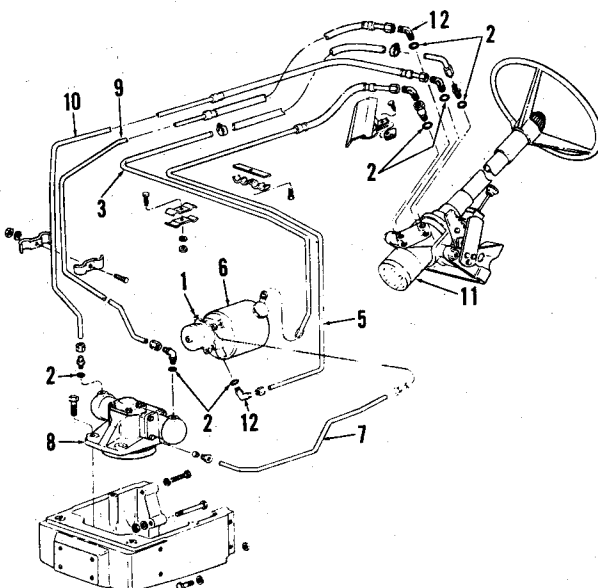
8600-9600 hydrostatic power steering system with integral hydraulic pump and reservoir. Refer to Fig. 4 for identification of components. Steering motor (11) is pressurized from tube (5) to lower port. Upper port returns unused fluid through tube (3) to reservoir (6). Tubes (9) and (10) are routed to front steering motor (8) from side ports.
